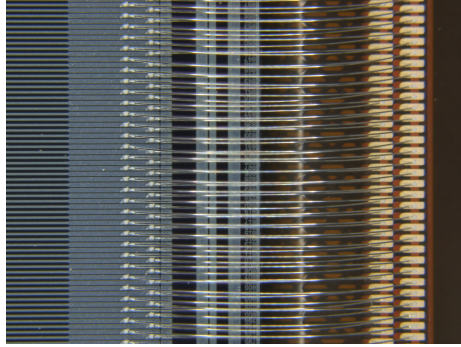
A close up view of the wire bondings on a dummy 2S module assembled at MPC@NISER.
